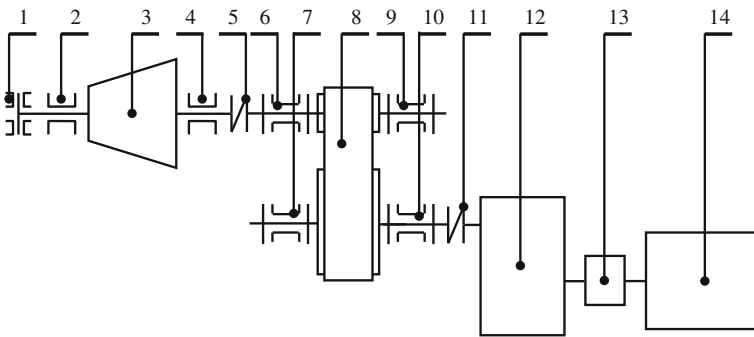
Configuration scheme of the solution variant 4 (belt transmission and high speed gearbox). 1, 2, 4, 6, 7, 9, 10 bearings; 3 turbine; 5, 11 elastic couplings; 8 belt; 12 high speed gearbox; 13 gear coupling; 14 electric generator
